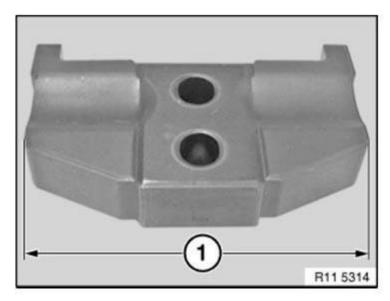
Identifying Guide Block Dimension Courtesy of BMW OF NORTH AMERICA, INC.
